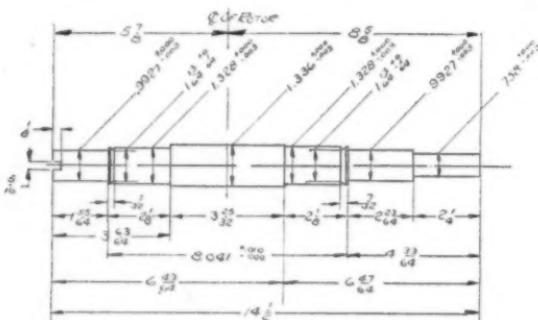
A typical motor shaft showing dimensions and tolerances of shear-cut operation. The pulley diameters, journals, seals and shoulder lengths, all must have close tolerances.
